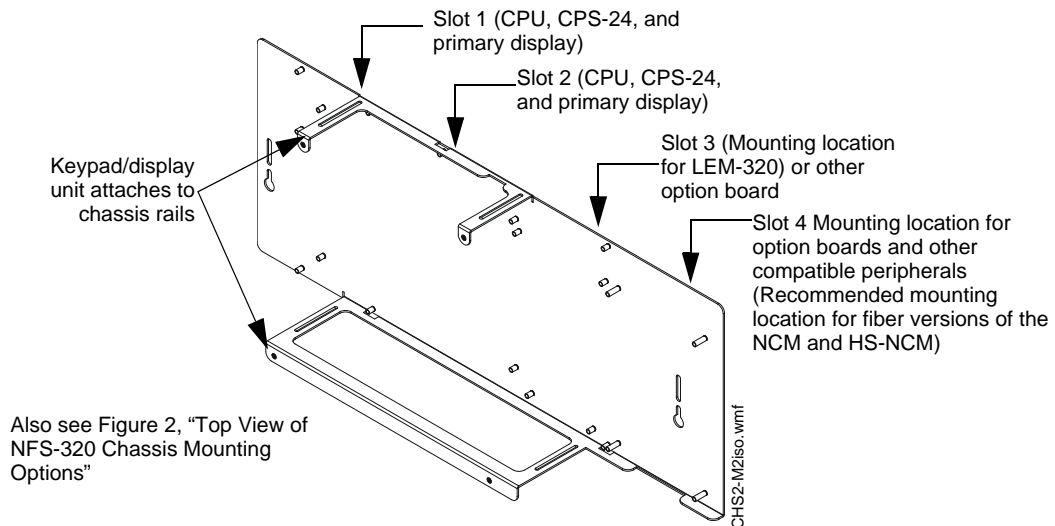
Side View of the NFS-320 Chassis Mounting Options
